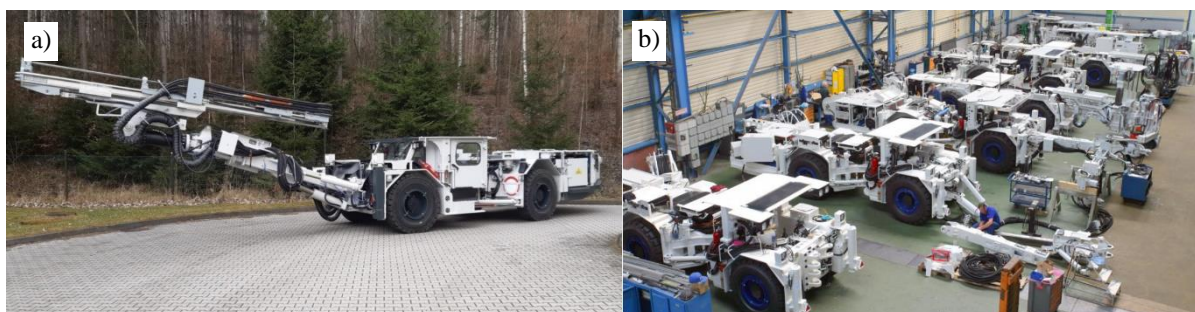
Face Master 1.7K self-propelled drilling truck: a) finished product, b) on the assembly floor [3].
